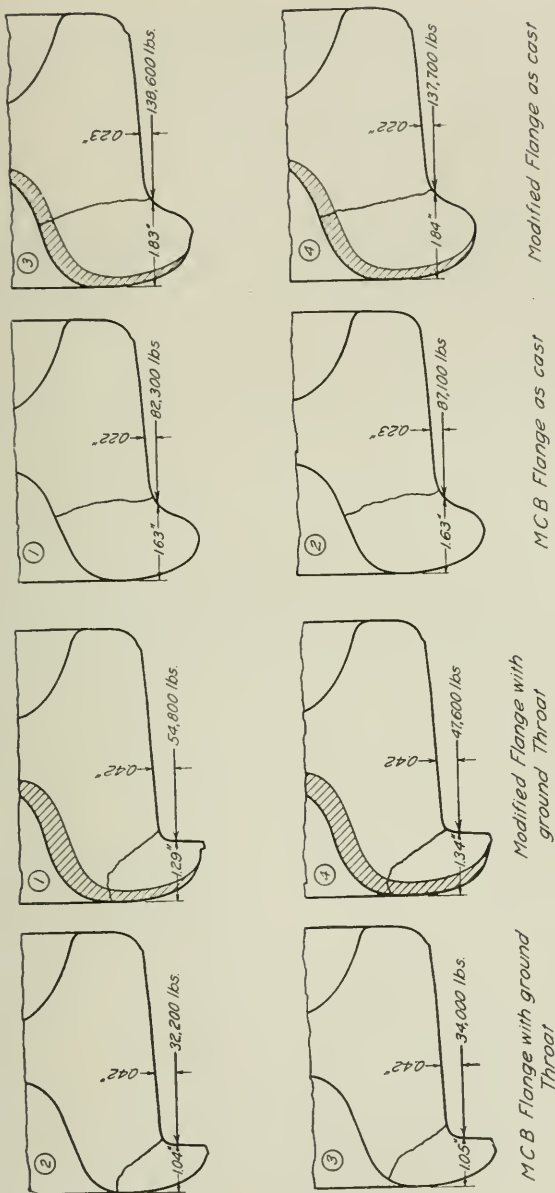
725-LB. M. C. B. WHEEL No. 158 531.
